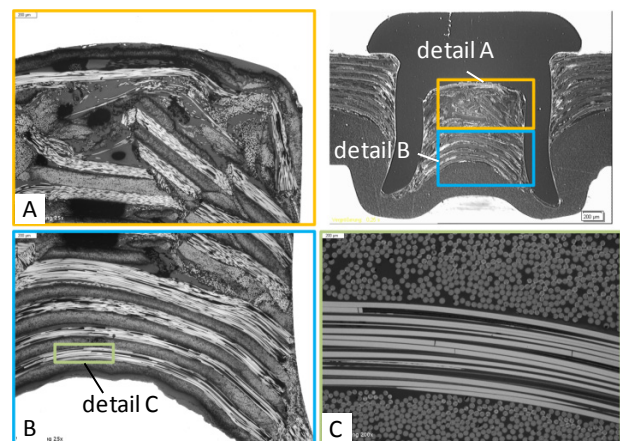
Close-up of the deformed and damaged laminate structure inside the rivet shank.
